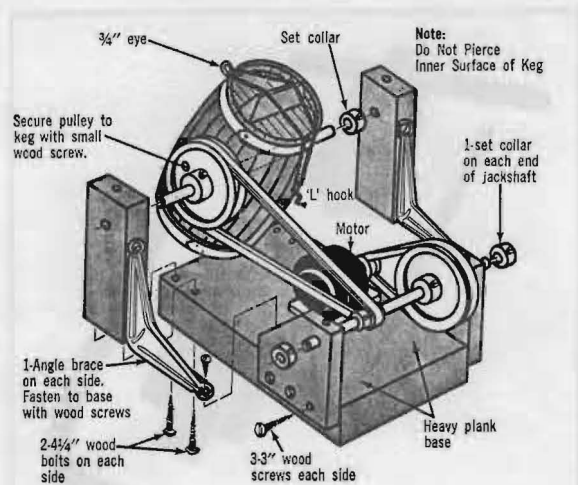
Commercial tumblers are on the market (they're identical to gemstone tumblers), but you may wish to make your own. Sketch provides the details. (Courtesy NRA)
